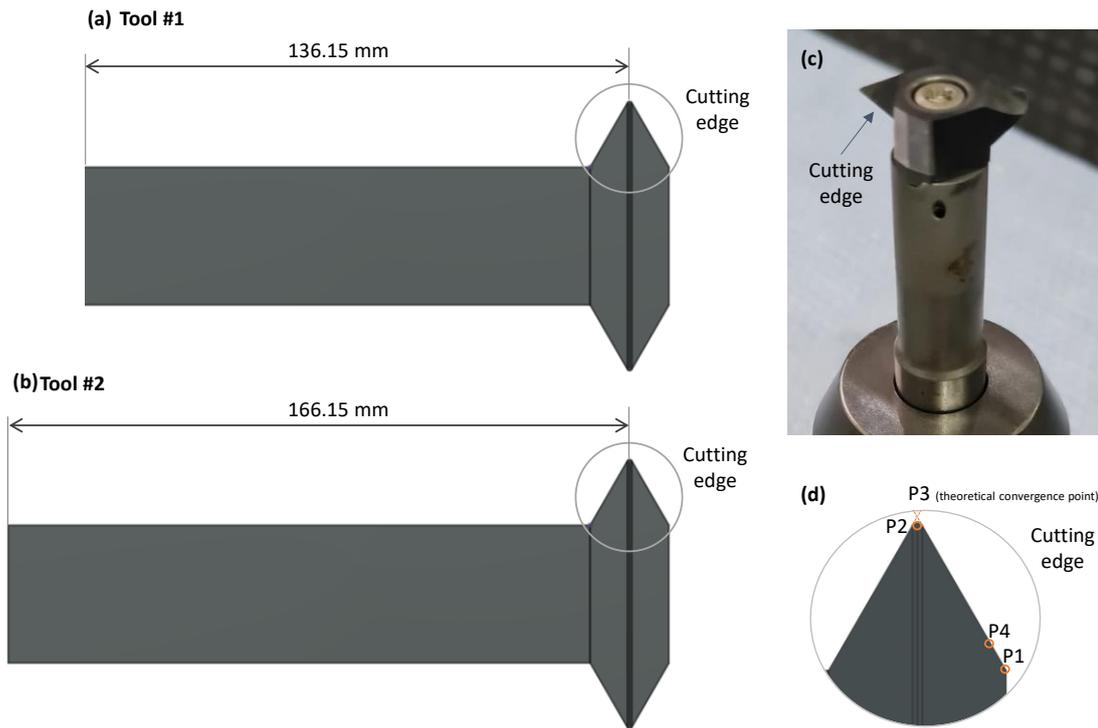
Illustrative representation of the machining tools (a) #1 and (b) #2 used for tool wear evaluation, as well as (c) the real tool and (c) the preset references in the cutting edges, highlighting the tool wear measurement points P1 to P4.
